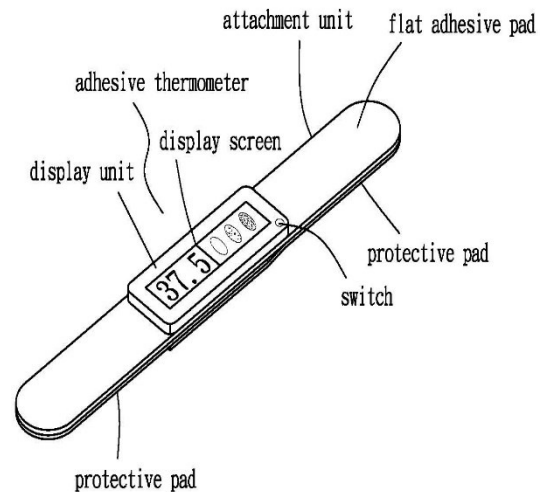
Exploded view of Multi-Color Display Adhesive Thermometer
